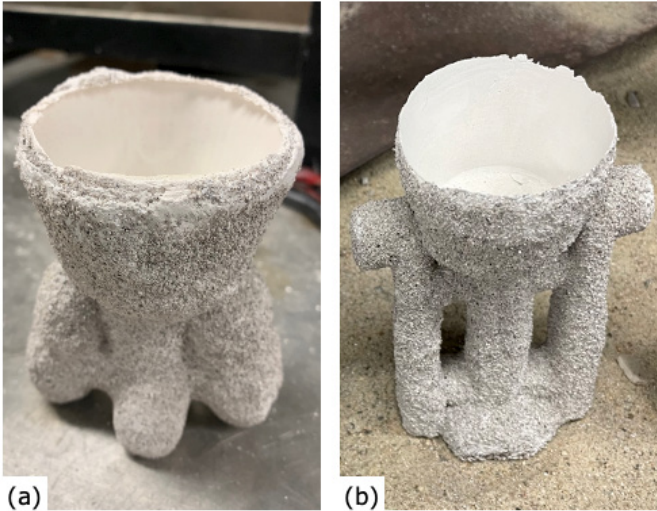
Ceramic shells after burnout (a) Part#12314649 casting tree assembly; (b) Part#12446263 casting tree assembly.
